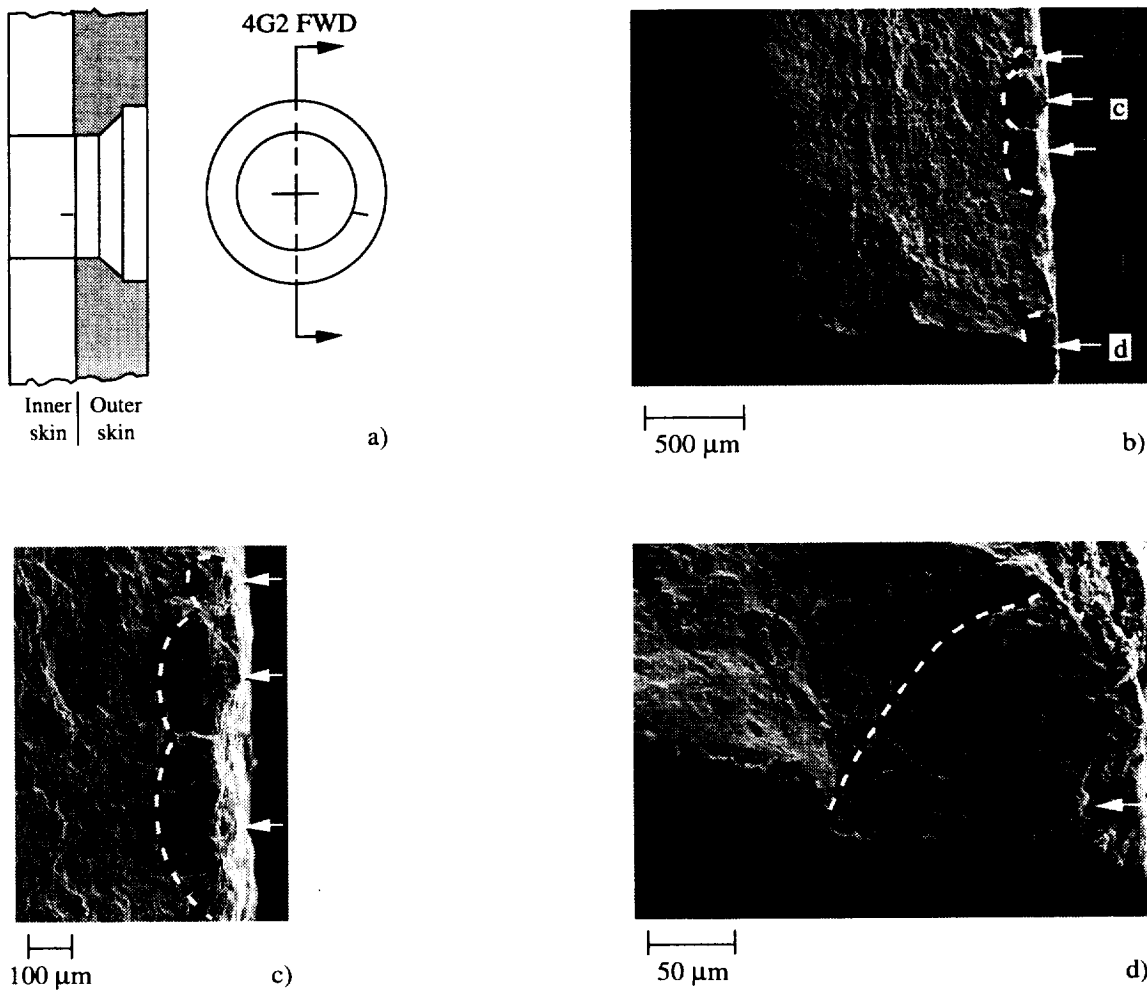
a) The schematic shows the rivet hole 4G2 configuration and the location of the outer skin fatigue crack oriented in the forward direction and about the 4 o'clock position. b) The SEM micrograph shows the location of small fatigue cracks located at the outboard corner and faying surface of the inner skin. The arrows mark the likely sites of fatigue crack initiation and the dashed lines mark the fatigue crack fronts. c) The SEM micrograph shows the fatigue crack, region "c" in Figure 11.44.b, along the inner skin faying surface at high magnification. The arrow marks likely sites of crack initiation and the dashed line marks the fatigue crack front. d) The SEM micrograph shows the outboard corner fatigue crack at region "d" in Figure 11.44.b. The arrow marks the crack initiation site and the dashed line marks the crack front.
